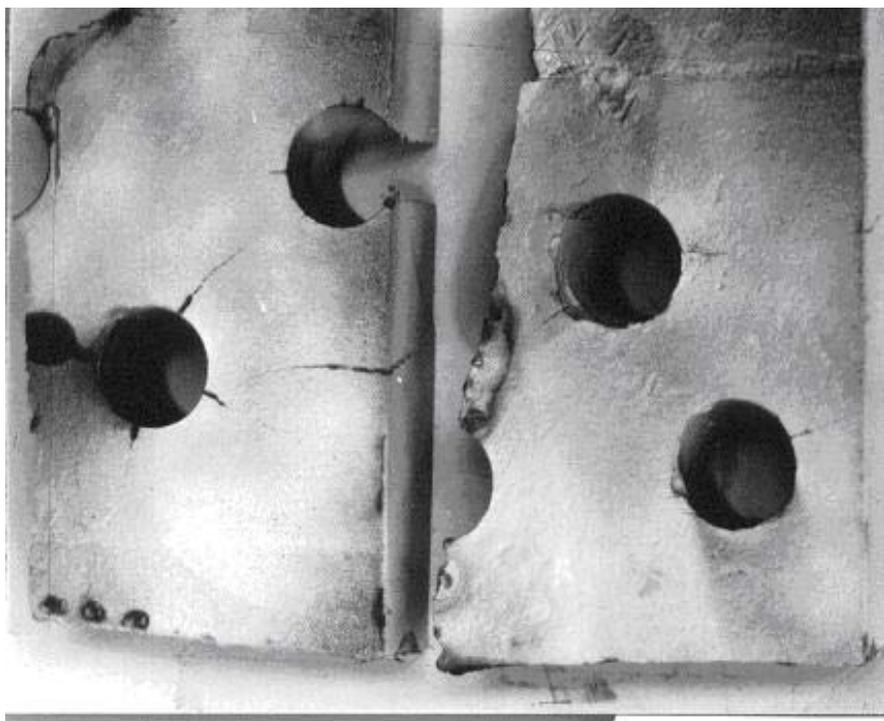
Cracking at a boiler tubesheet due to caustic concentrating between the tube and the tubesheet.
